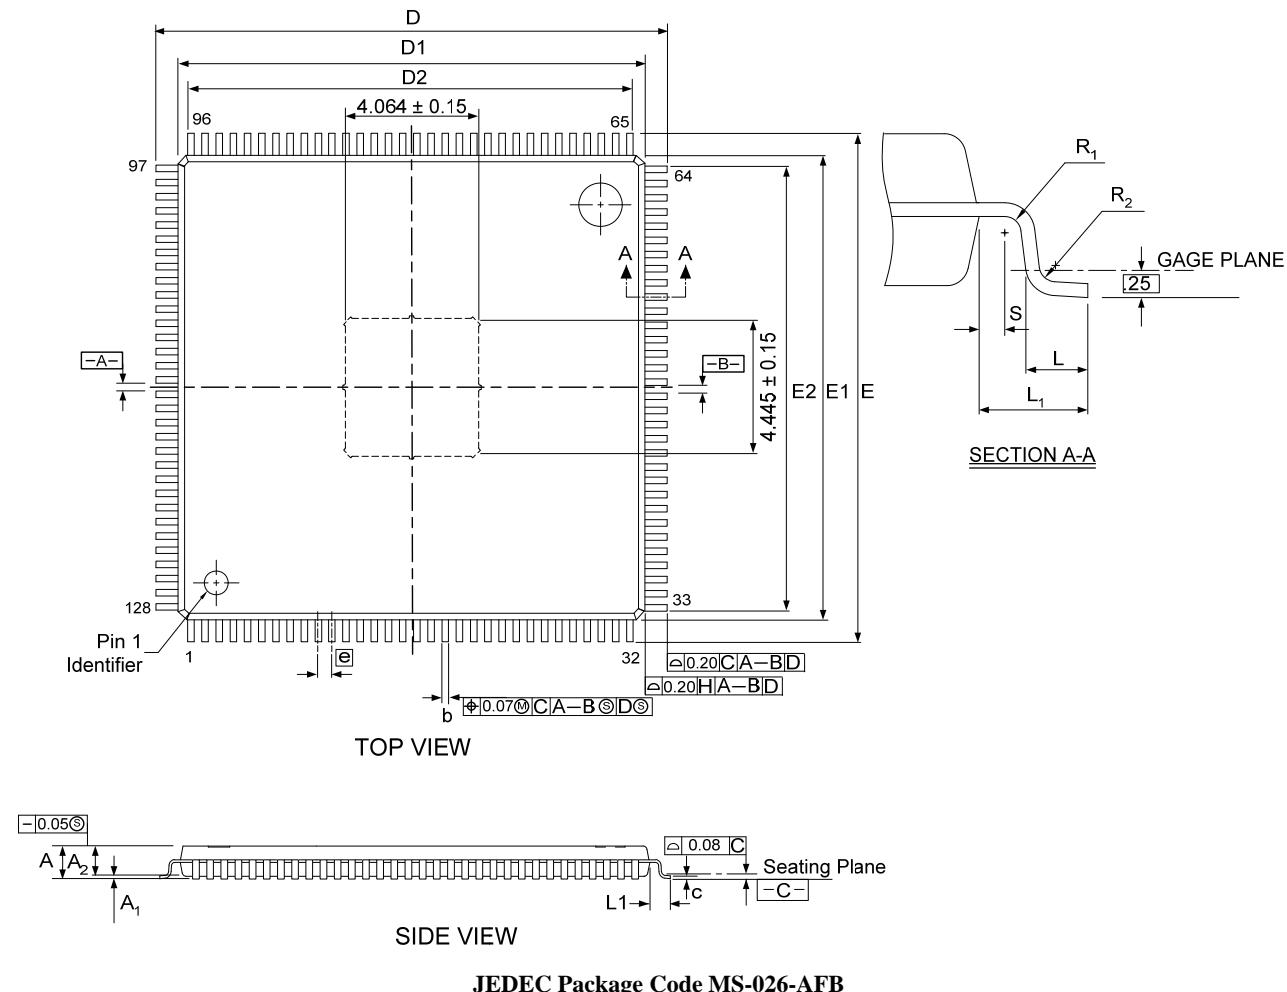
on the next page shows the package dimensions of the SiI9127A receiver.
